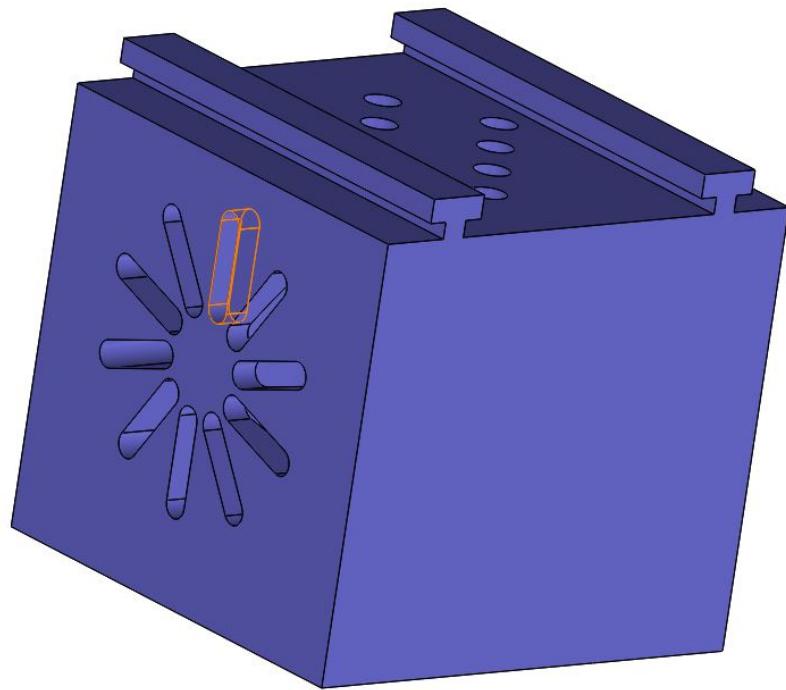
Ferrarer, Auston: Extruder Housing
